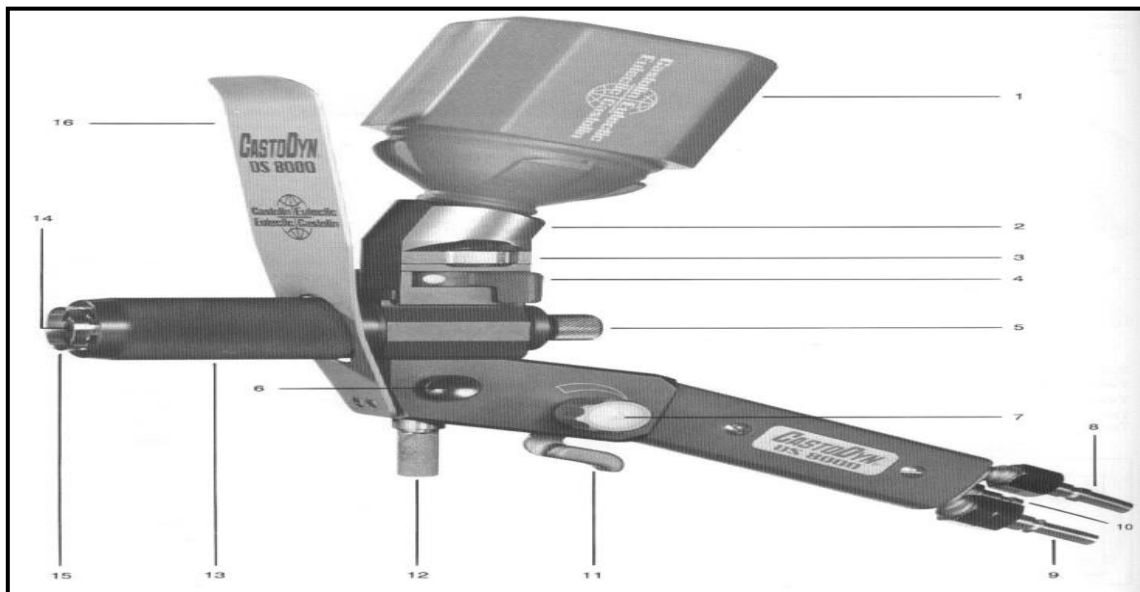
The assembled torch with components [Courtesy- Castolin GmbH, Germany].
